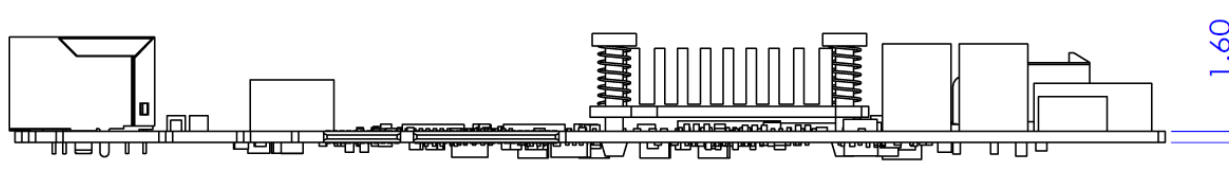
PCIe-GIEV4V PCB layout (Side View)
